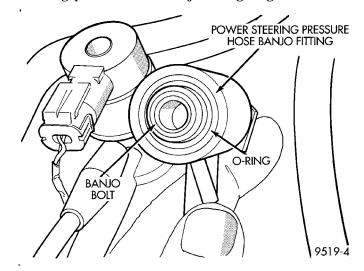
O-Ring Installed On Power Steering Hose Banjo Fitting
